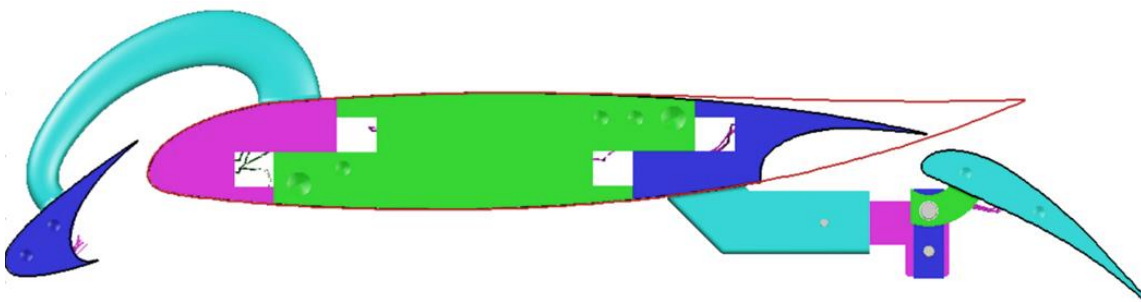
Cross-section of original DLR's F16 model with slat, wing and flap. Modification is shown with the red outline such that a 2 element model can be created (slat and wing).
